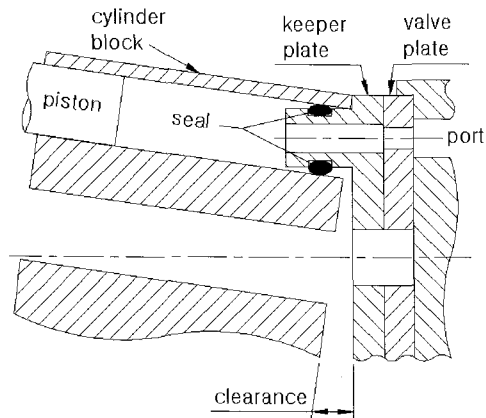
Conceptual Drawing for the Sealing Mechanism of the Keeper Plate
